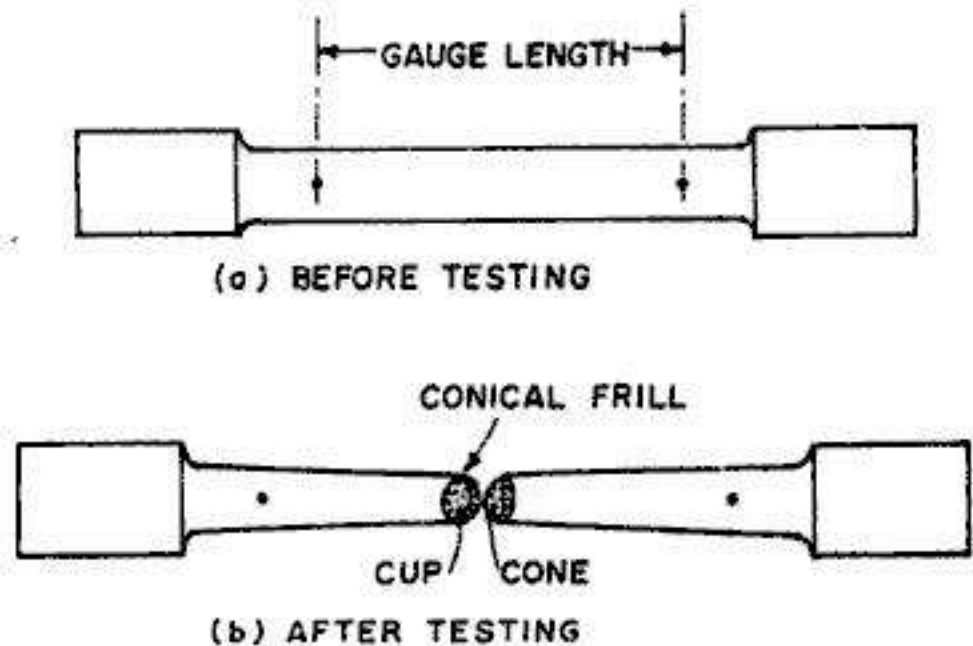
TEST SPECIMEN BEFORE AND AFTER TESTING
